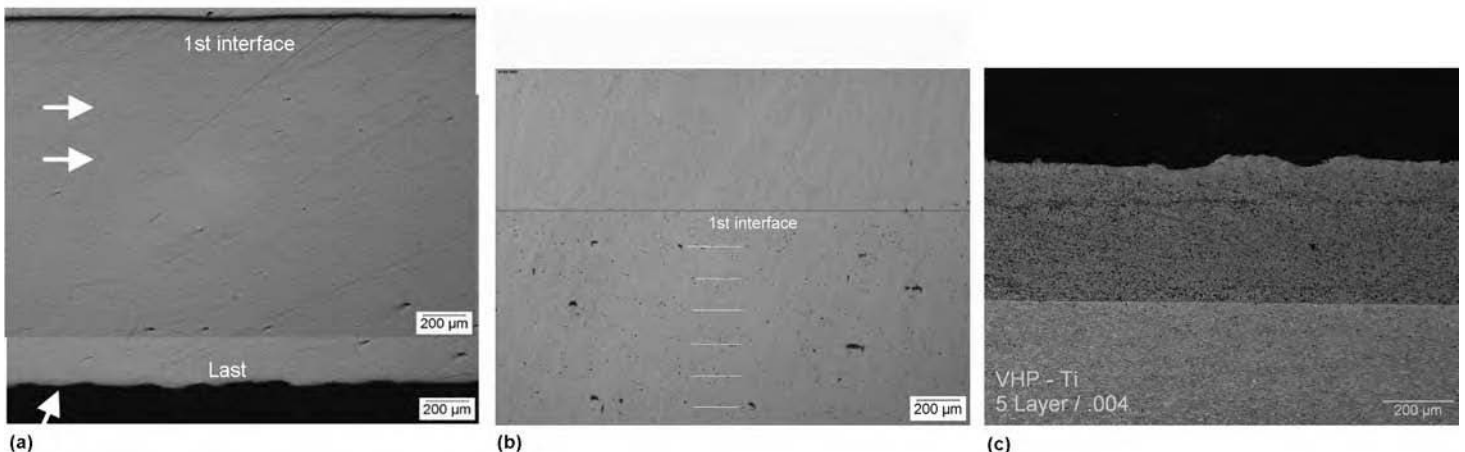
Bonding of materials with very high-power ultrasonics. (a) Cu 1100, 12 layers of 1.5 mm (0.06 in.) thickness. Image inverted. (b) Al 6061, 1.5 mm (0.06 in.) thickness. Image inverted. (c) Titanium CP-4, 1.0 mm (0.04 in.) thickness. Courtesy of Edison Welding Institute
